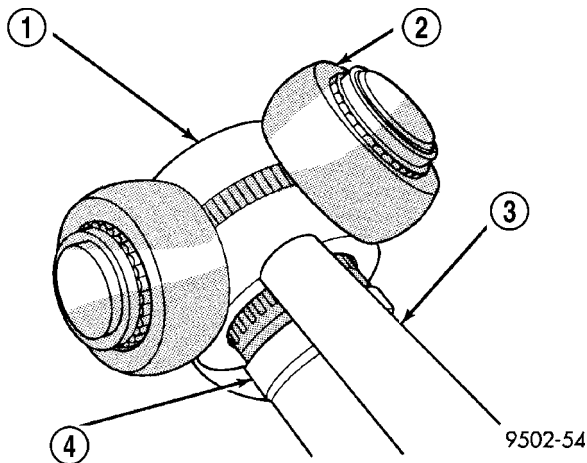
Spider Assembly Removal from Interconnecting Shaft
